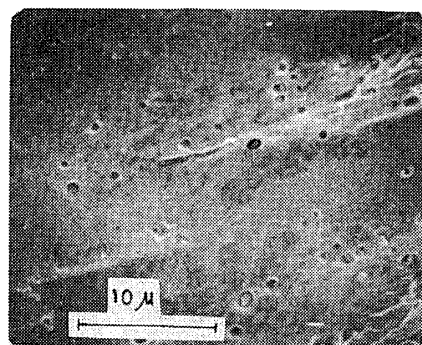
Fracture surface of vertical crack in weld metal (SCM22H)
